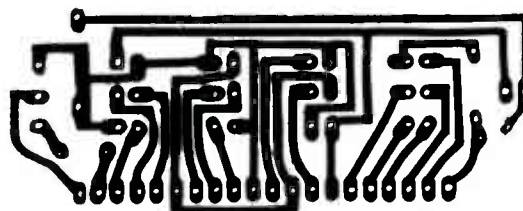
MOST OF THE control switches are mounted on this small board, Board 3. Note that this foil pattern is shown full-size.
